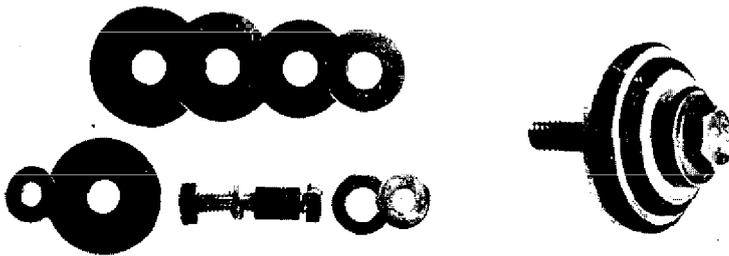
Exploded and assembled views of galvanic corrosion specimen for atmospheric exposures
